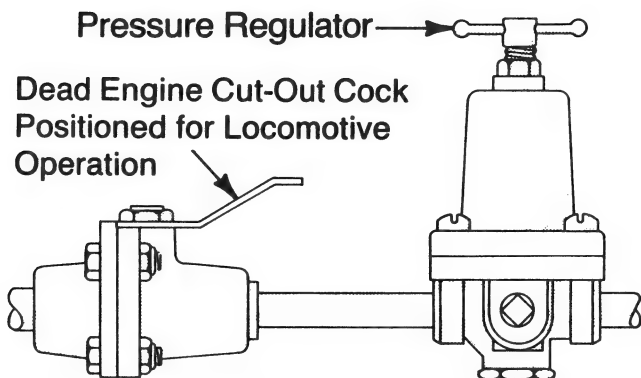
Dead Engine Cutout Cock and Pressure Regulator
